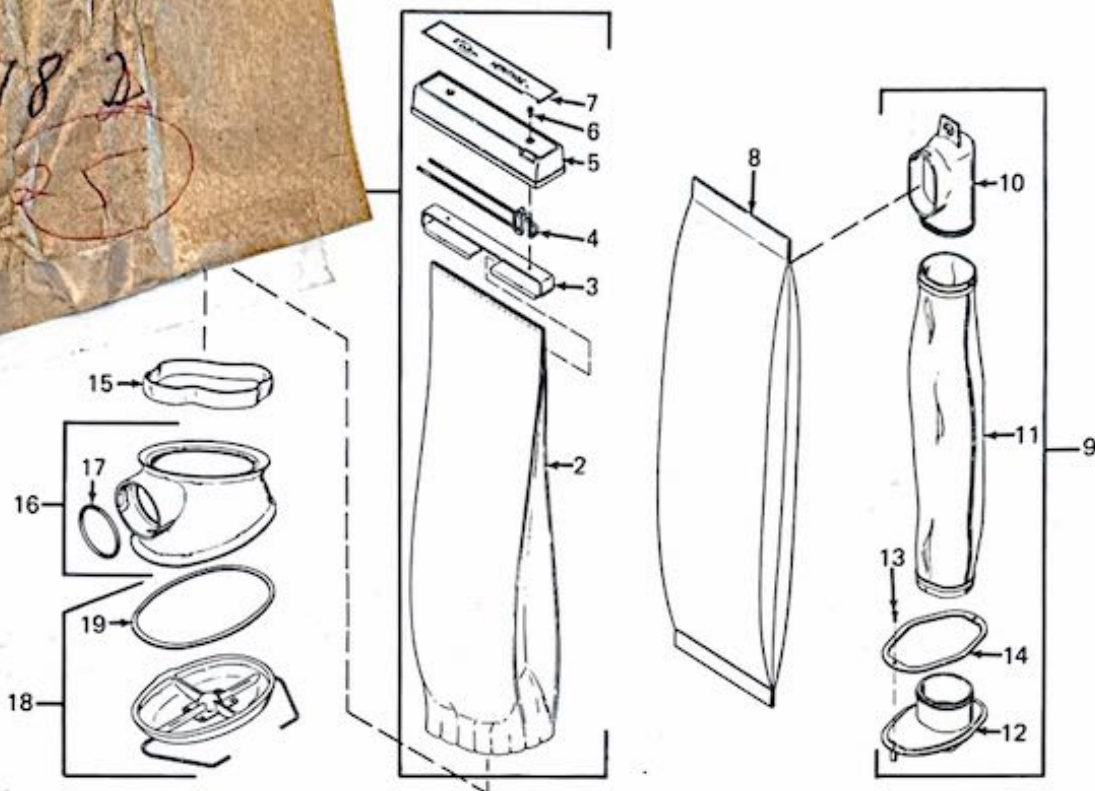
HERITAGE Sani-Em-Tor and bag group, with disposable bag, exploded view
